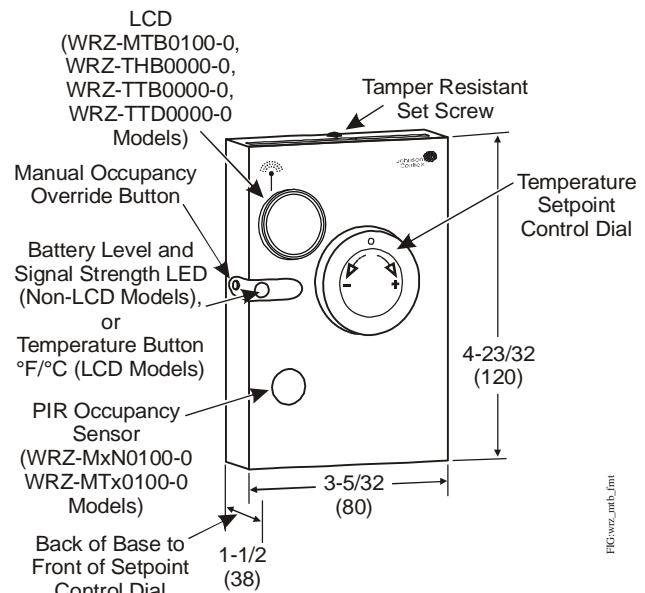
WRZ Series Sensor Physical Features and Dimensions, in. (mm)
